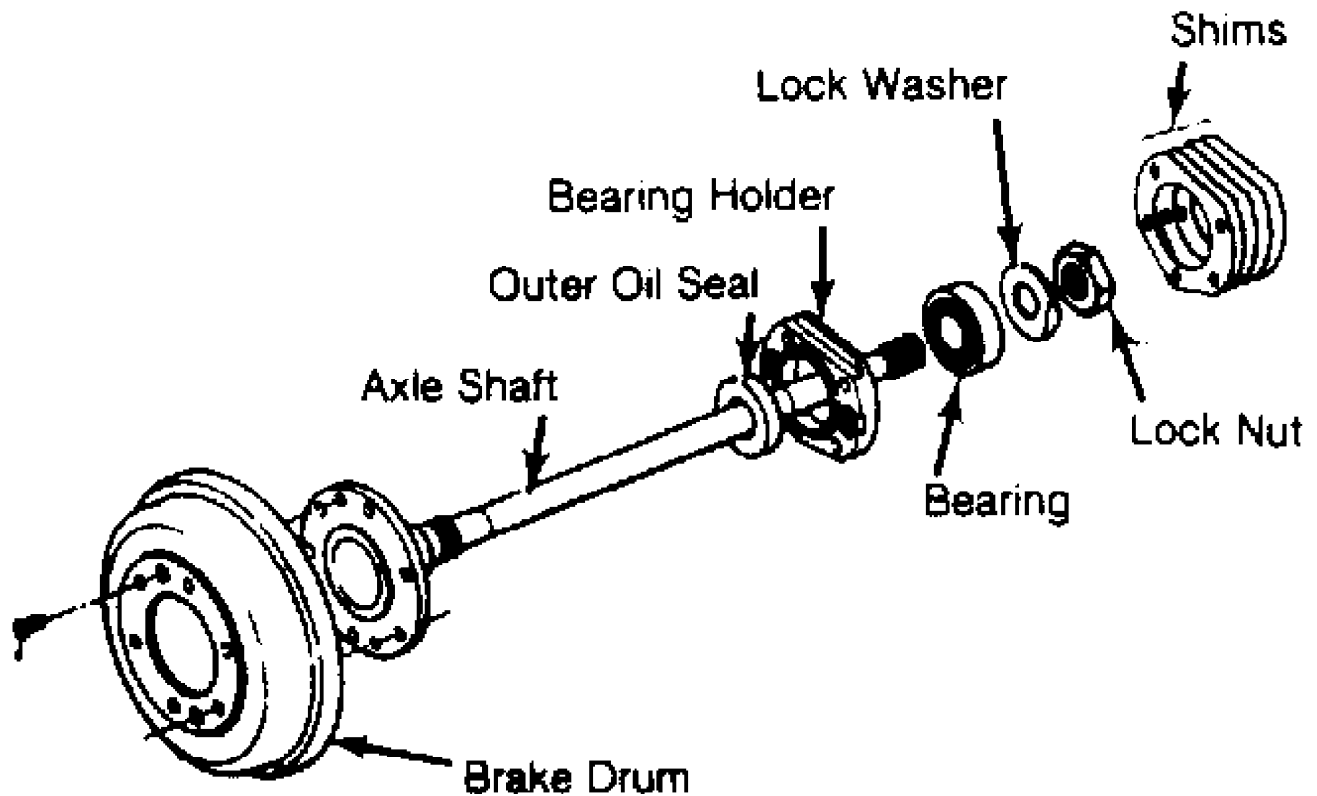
Exploded View of Rear Axle Shaft Assembly
